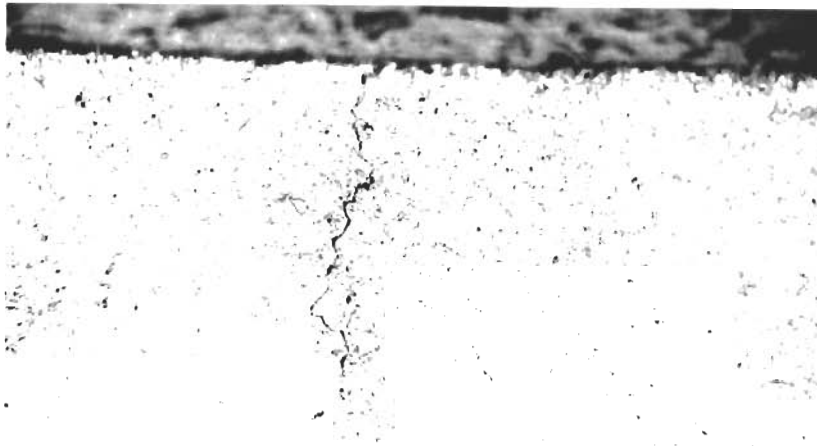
Fracture Origin - Axle Beam Failure 11/61
